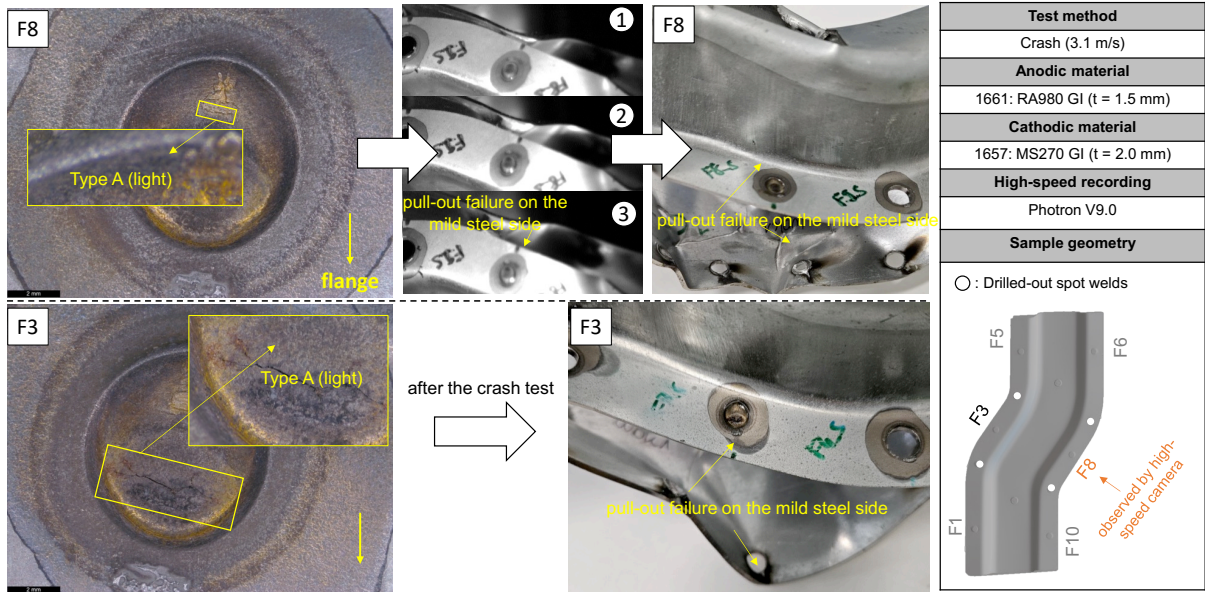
Spot weld failure in sample 29 (MTC1)
